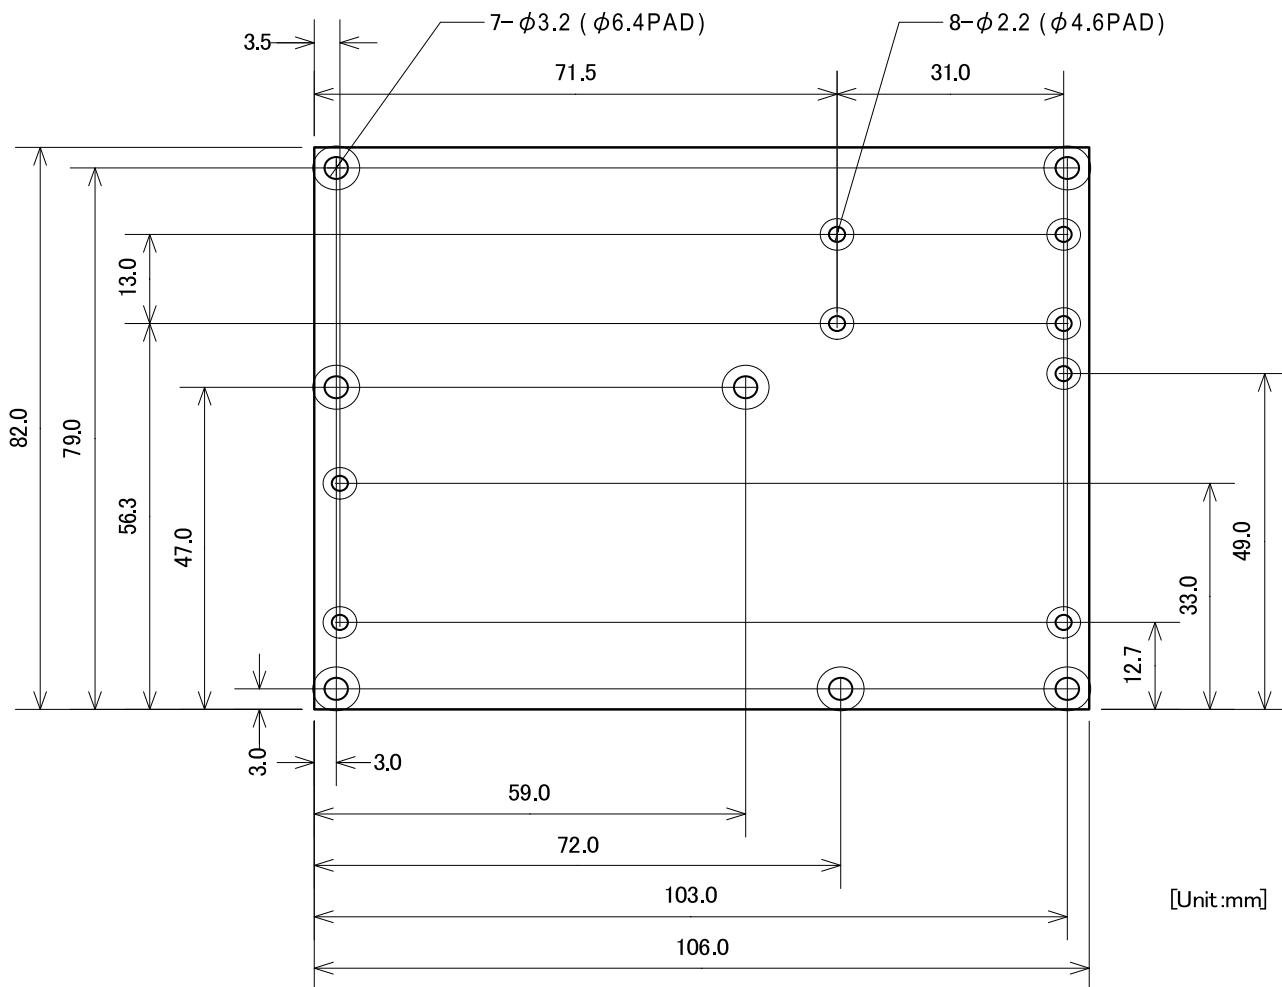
LCD Expansion Board (Product Revision B) Dimensions and Fixing Hole Measurements
